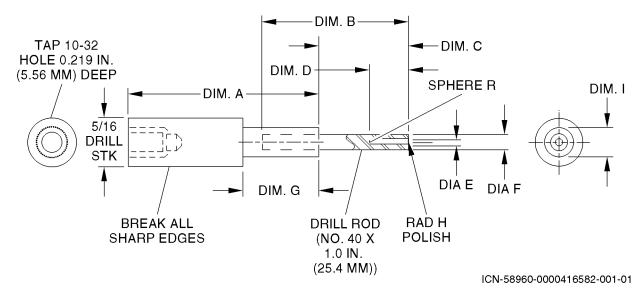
Contact Seating Inspection Kit Contact Adapter, T3009406-11
